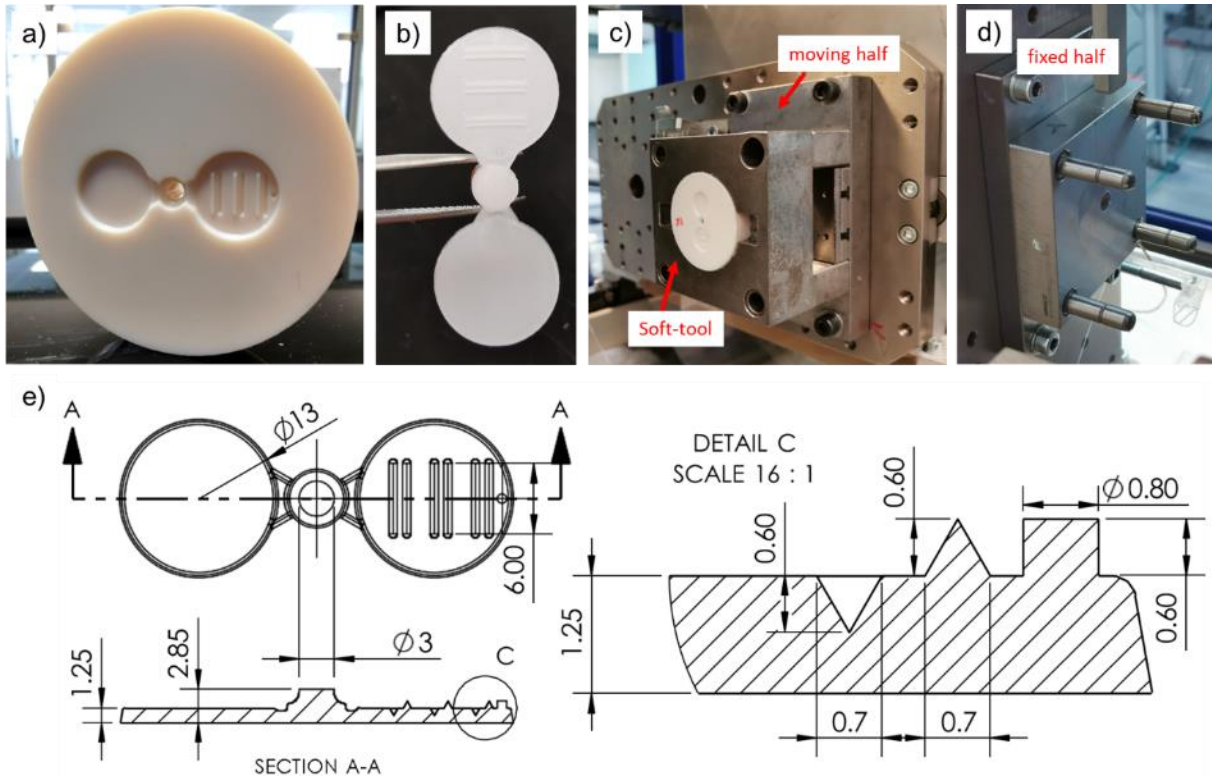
Details of the tool and product design: a) An image of the soft tool; b) an image showing the product/moulding; c) image showing the moving-half of the mould assembly; d) image showing the fixed-half of the mould assembly; e) the technical drawing showing the dimensions of the product design including the microfeatures.
